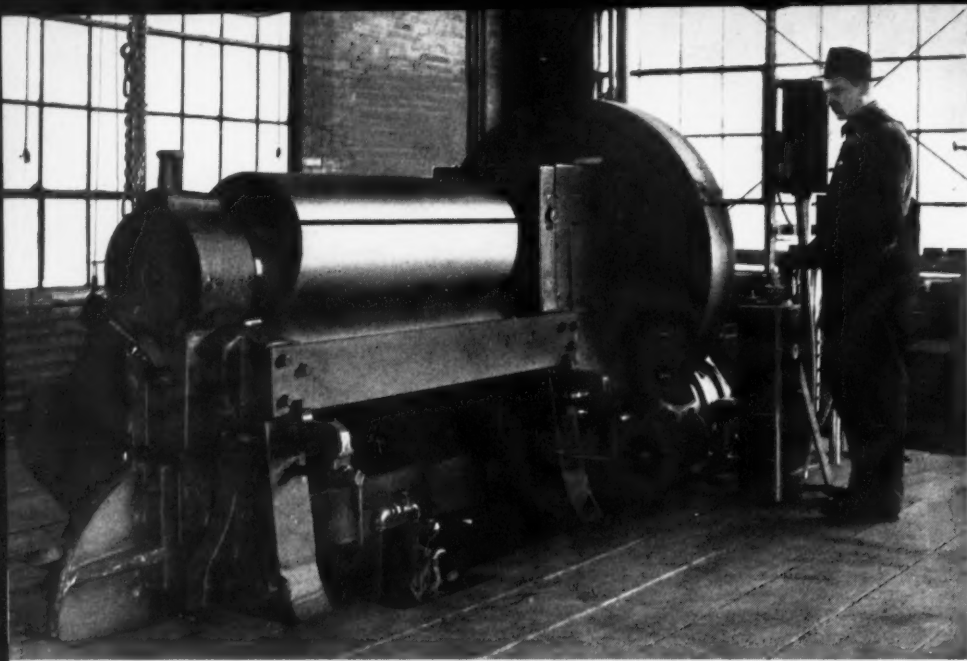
Rolling a Steel Plate that has been Crimped into a Cylinder; the Housing at the Left-hand End of the Machine Swings Open for Removing the Work
